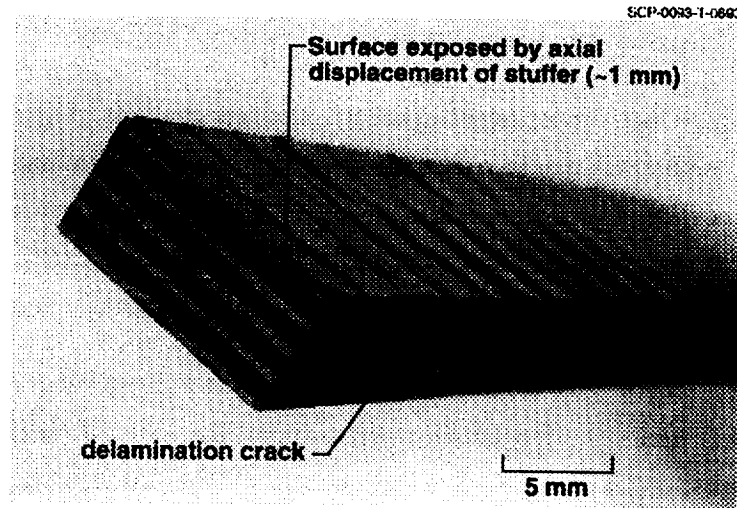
A delamination crack created in a specimen of type *h-O-1* by three point bending, with large mode II crack opening displacement. The upper surface shows systematic damage caused by warp weavers that bridge the delamination crack.
